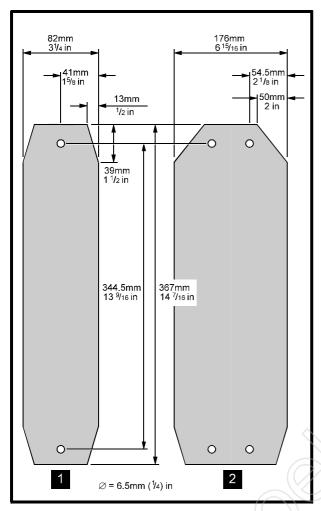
Dimensions for the fabrication of baffle plates for model sizes 1 and 2
